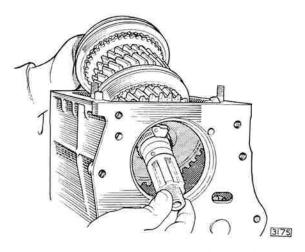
Removal of the mainshaft. Note the hose clip fitted to the mainshaft to retain the reverse gear.
